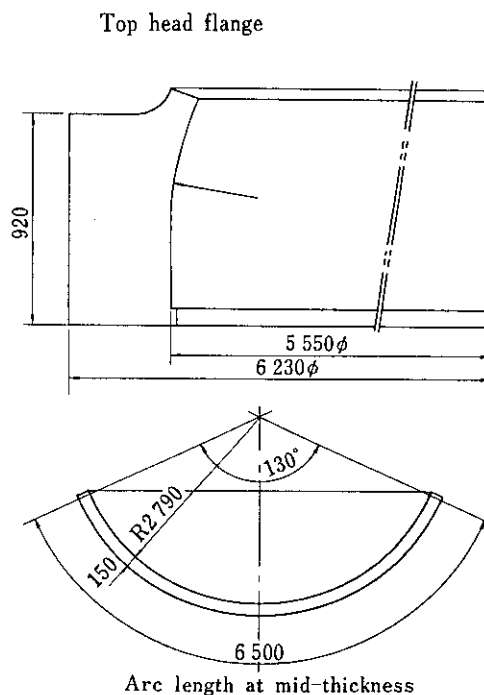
Dimensions of trial forging for 800 MWe class flange and dome
